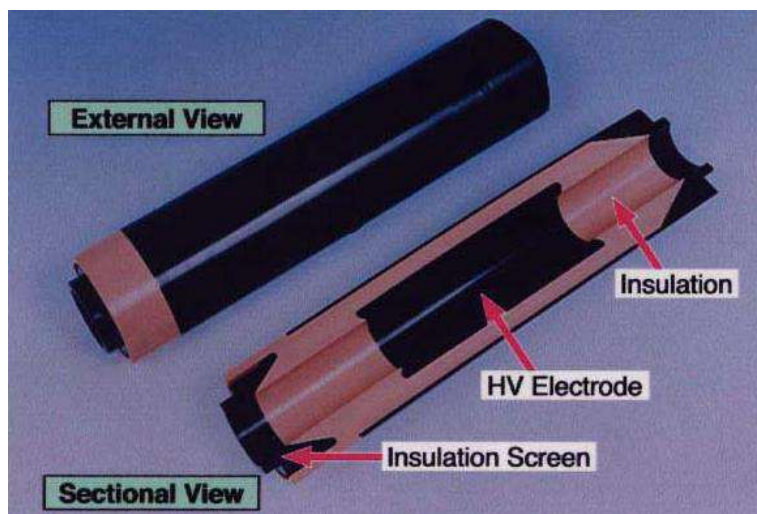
Joint for XLPE Cable – Joint Insulation Mould Assembly [9]
